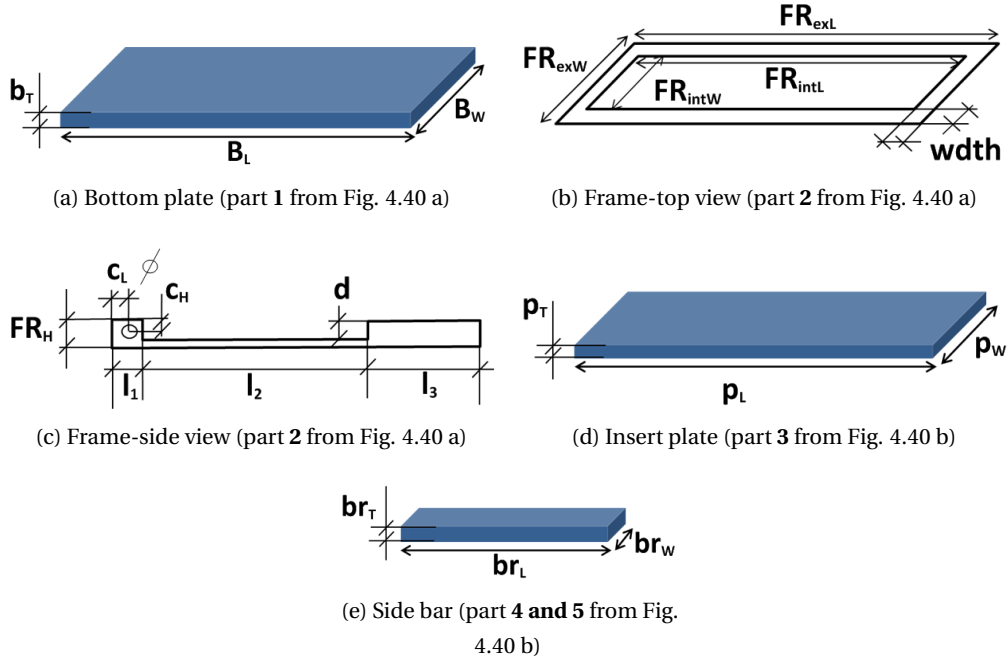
2D sketches of the designed mold: (a) Bottom plate, (b) Frame - top view, (c) Frame - side view, (d) Plate used for creating the air gap and (e) Side bars, mounted on the top of the plate for the air gap.
